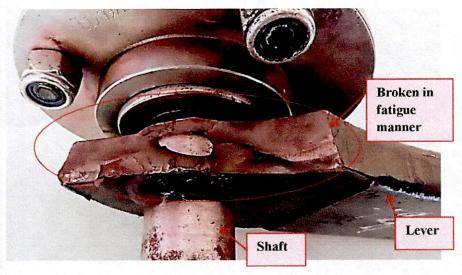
Photograph showing breakage of Bell Crank lever in fatigue manner.
